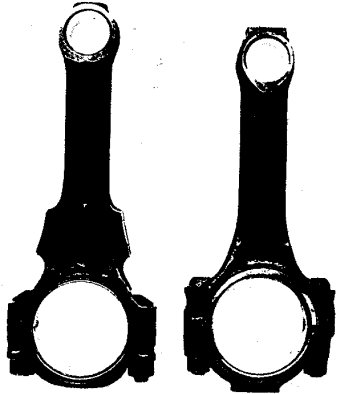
Typical locations of balancing bosses on connecting rods.
